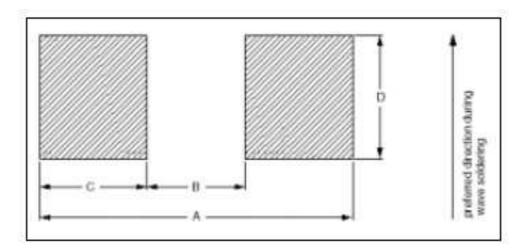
RECOMMENDED FOOTPRINT DIMENSIONS
